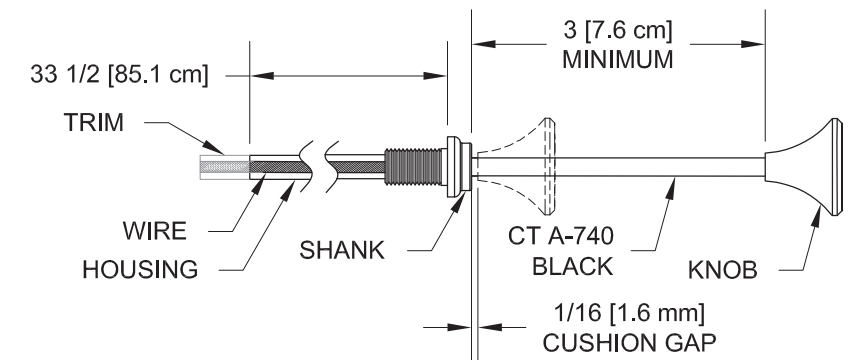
TRIMMING THE CABIN HEAT CABLES
